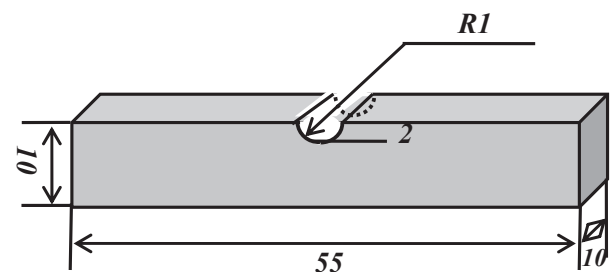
Dimensions (in mm) of the Charpy U-notch impact sample.
